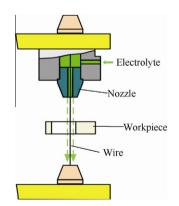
Sketch of wire electrode fixture for axial electrolyte flushing.
